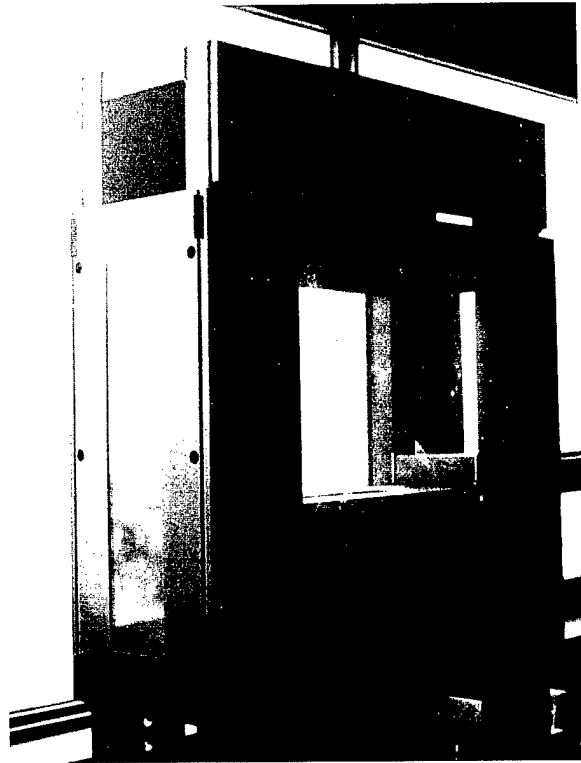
Extrusion press used for extruding consolidated solder powders into cylindrical rods.
